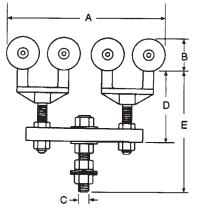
Ball Bearing Finish – Trucks Zinc Plated Load Bar Painted
